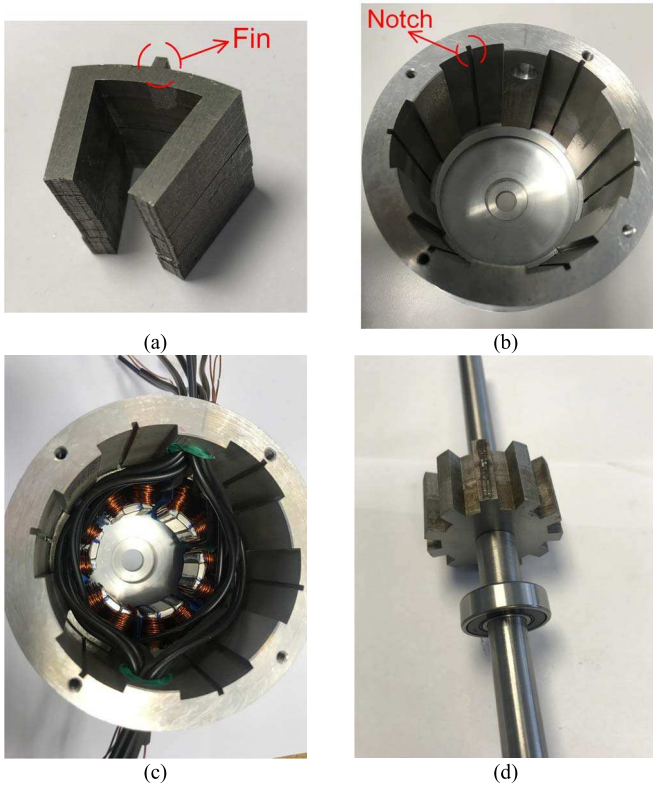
Photographs of 12/11-stator slots/rotor poles MS-HSSPMM prototype. (a) Stator core segment. (b) Stator frame. (c) Assembled stator. (d) Rotor.
